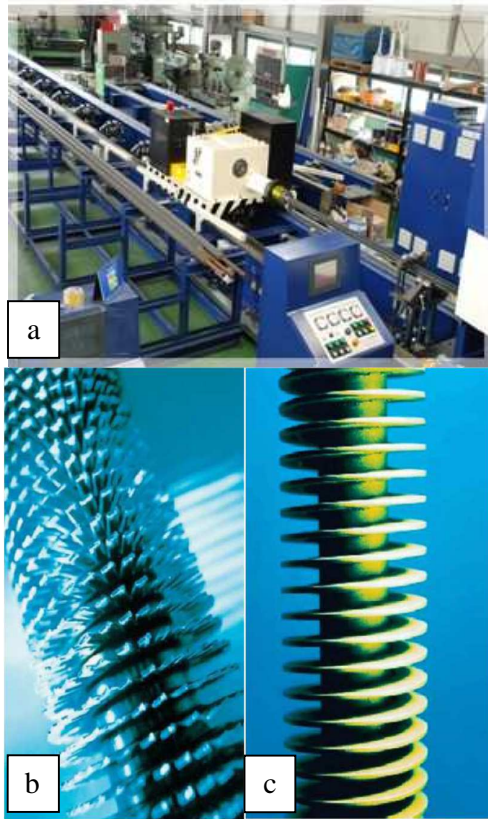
(a) Automated line for welding process currents of high frequency (b) Tube with serrated fins (c) Tube with solid fins .
